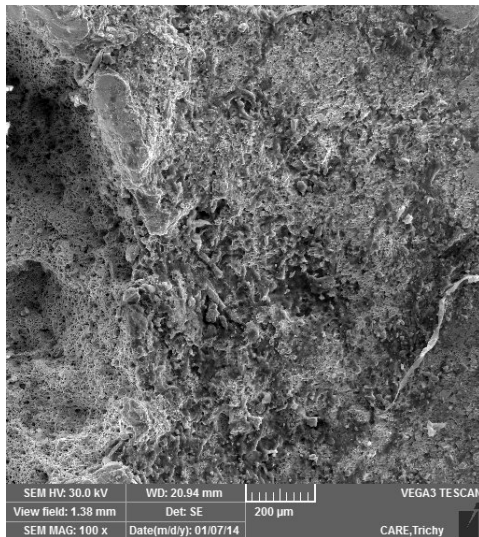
fractography image shows micro voids and dimples in ductile fractured As-received specimen.
